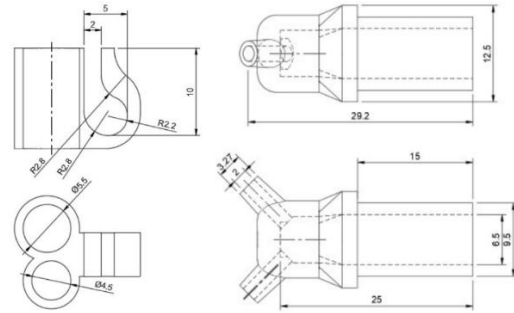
Hose clip with an integrated tube gripper and the cuvette lid with inlet and outlet ports
